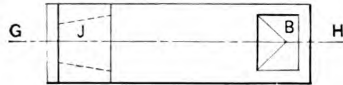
Plan of Core Board for Perpendicular Branch with Flange B of Figs. 105-107.
